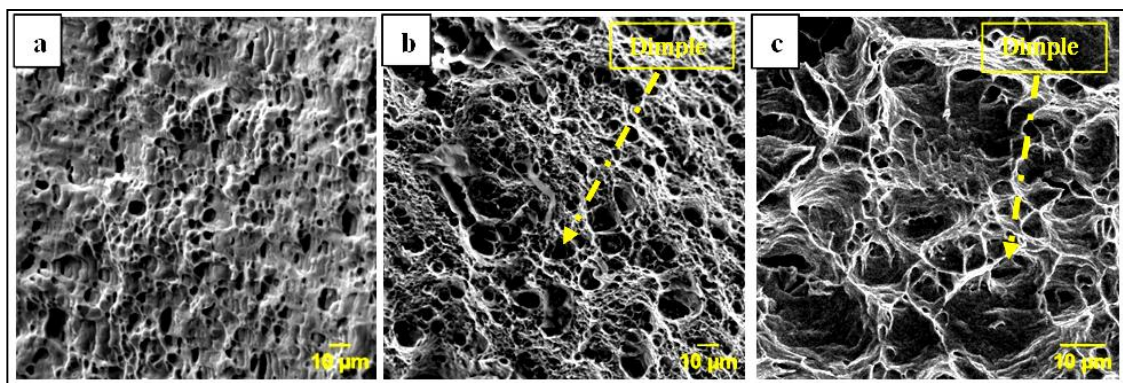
Fractographs for (a) AA5083, (b) weld region of FSTWB and (c) AA6082
